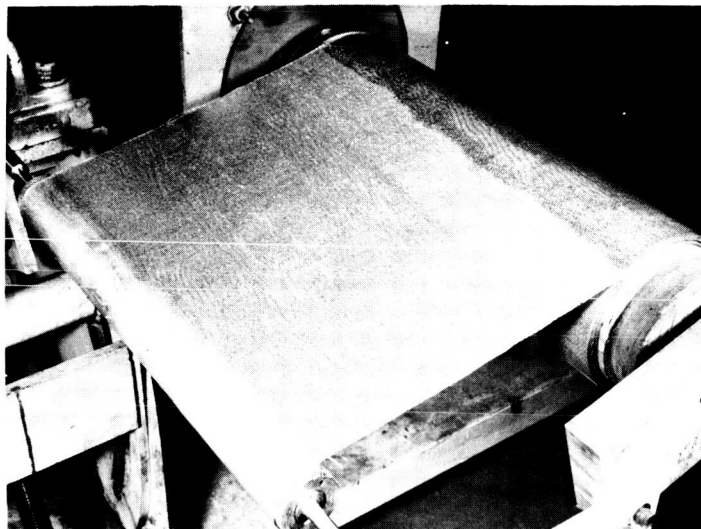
Mandrel Assemblies Used for Fabricating Tensile Cylinders
